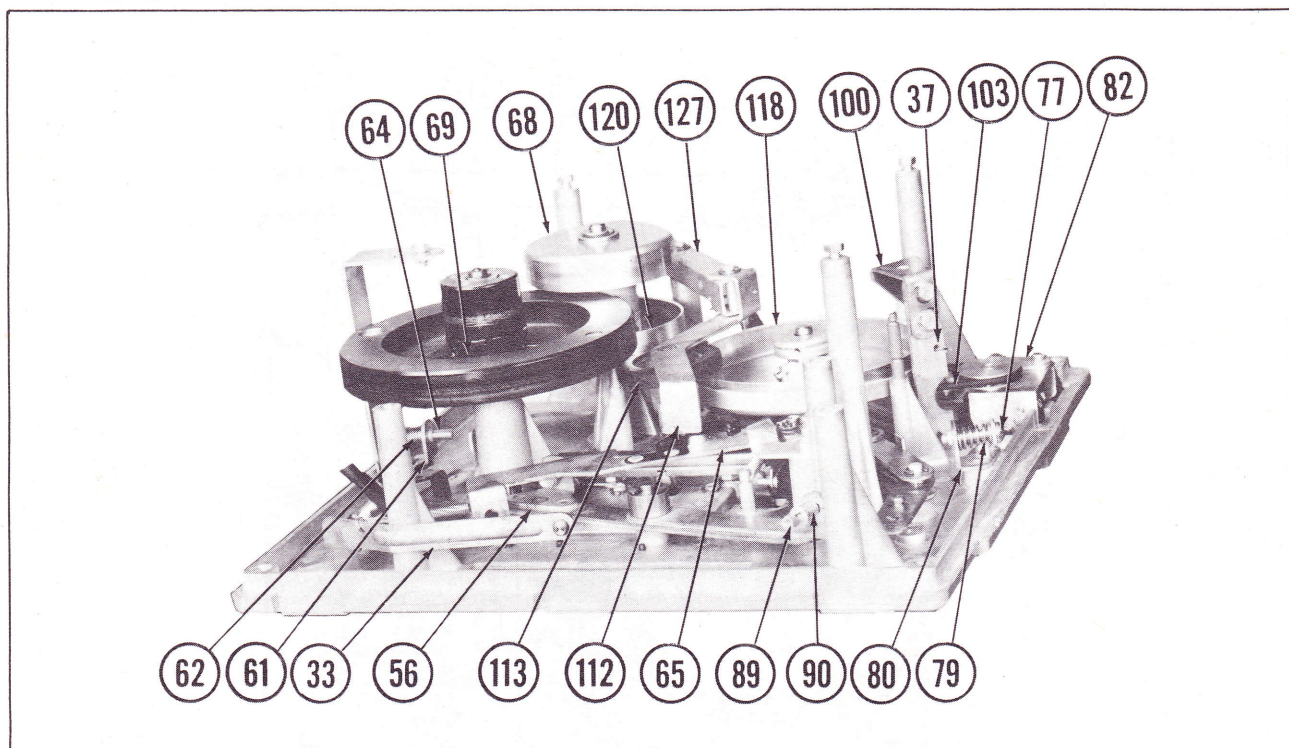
BOTTOM VIEW OF MECHANISM WITH MOTOR MOUNTING PLATE AND PUSHBUTTONS REMOVED.
